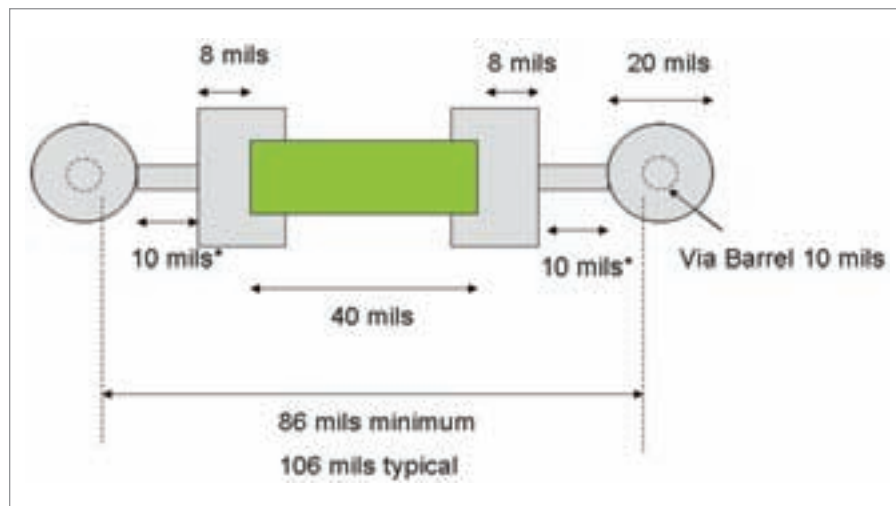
Typical minimum 0402 capacitor mounting dimensions
